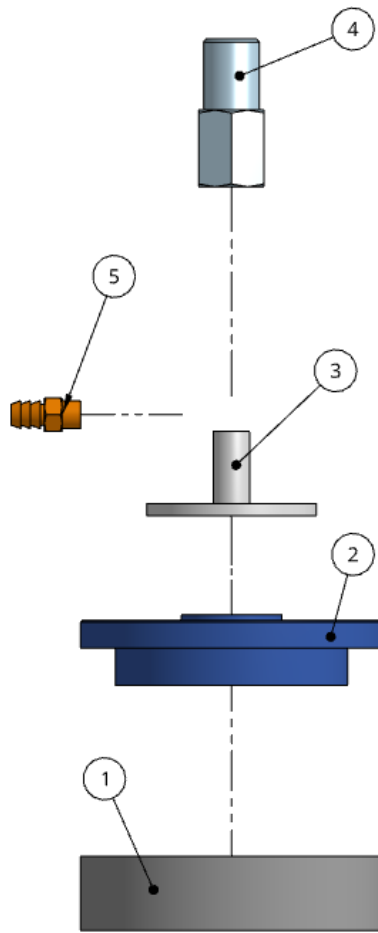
Exploded view of the vacuum pad gripper assembly used in the final design.
